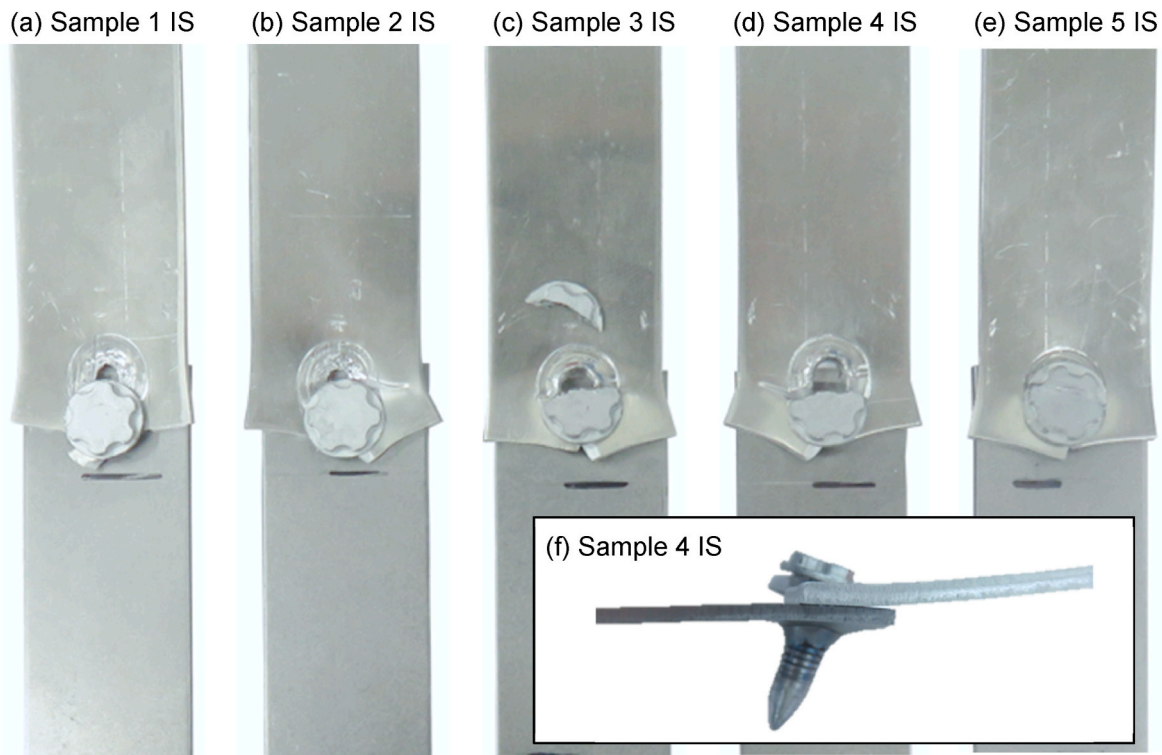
Fracture pattern after mechanical testing according to DIN EN ISO 14273. Samples generated with the initial system. (a)–(e) Combination of tear out failure clamped part and failure of the screw. (f) Side view Sample 4 IS (Graf et al., 2018).
